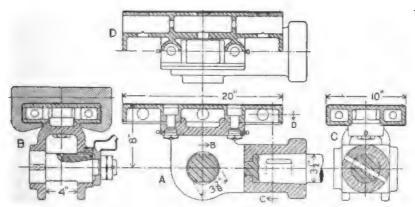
Locomotive Cross-head of the Marine Type, Pennsylvania Railroad express engine, 204" by 26". Scale 1 to 12.
